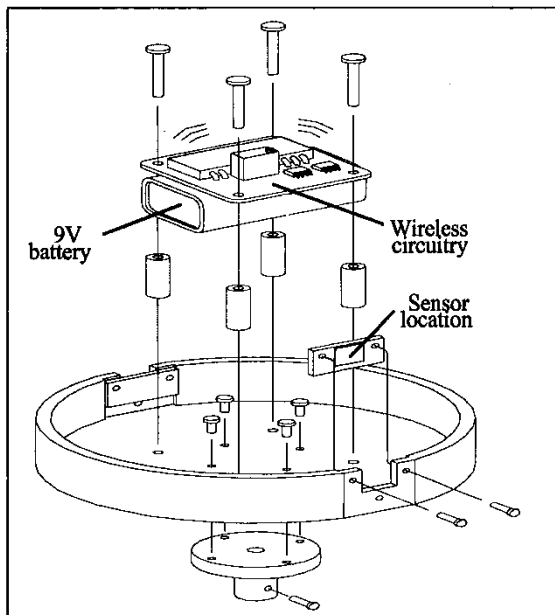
Conceptual drawing of the experimental rotating disk packaged with wireless rotation MEMS sensors.
